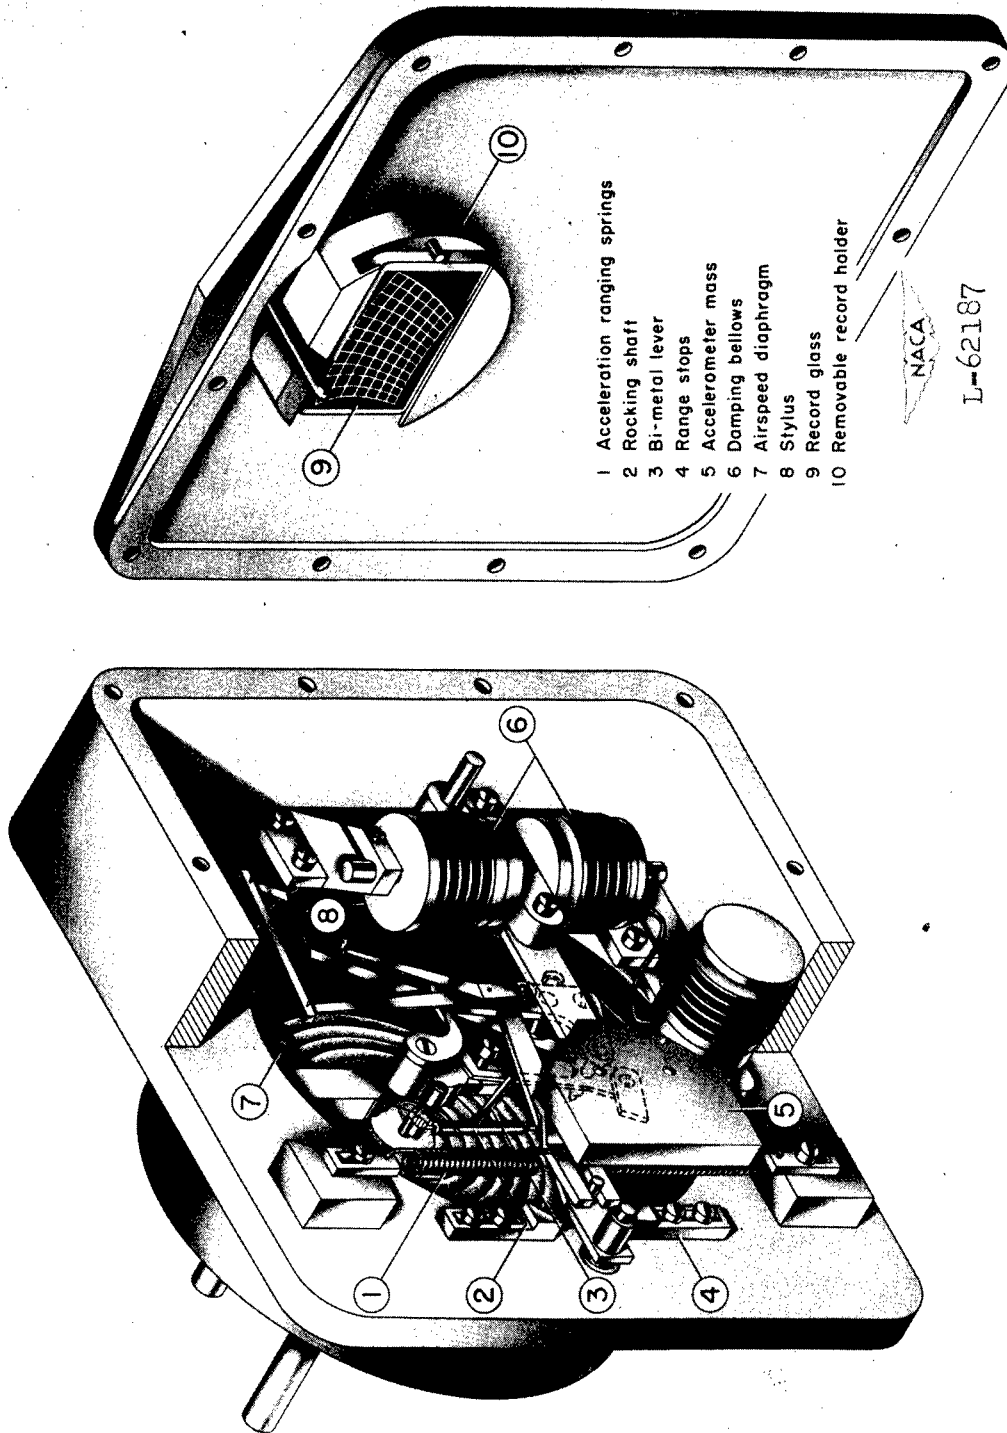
Cutaway pictorial drawing of mechanical linkage in the
